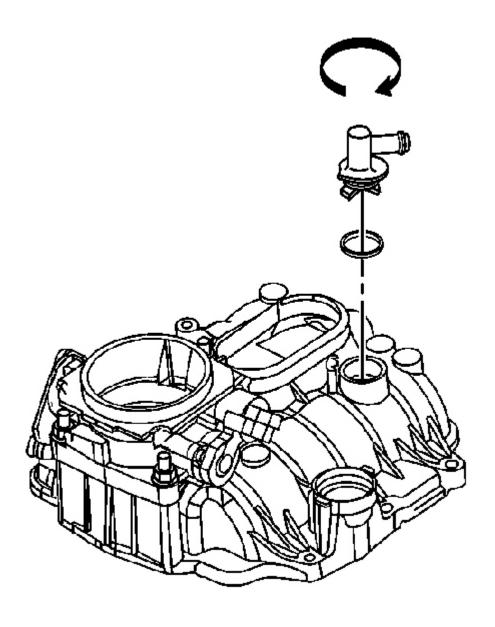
Power Brake Booster Vacuum Fitting Courtesy of GENERAL MOTORS CORP.
